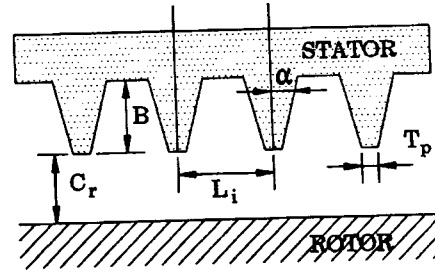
Balance drum labyrinth seal geometry of ethylene refrigeration compressor
